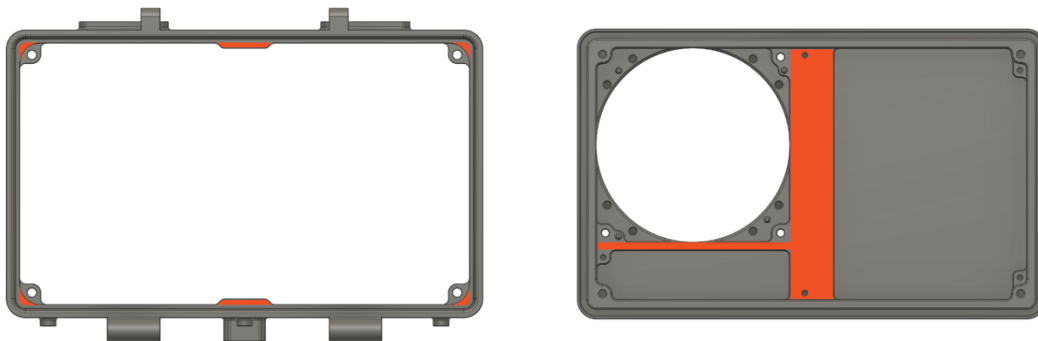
Main housing exterior shell viewing from back side. The red sections are designed to improve the overall rigidity of the device.
